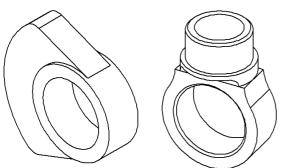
Rod End Mounts (Wheel-side and Chassis Side)
